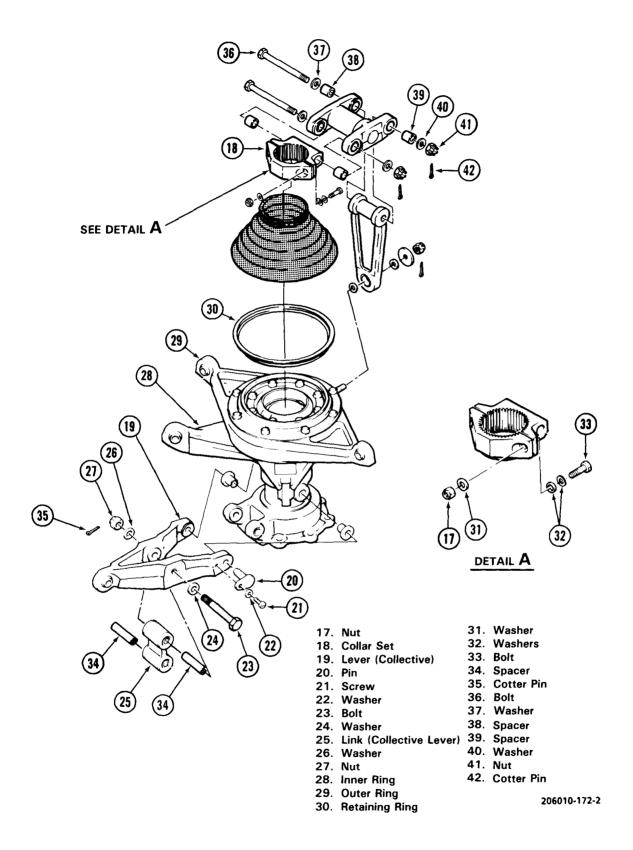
Collective Lever, Idler Link, and Collar Set Installation (Sheet 2)
